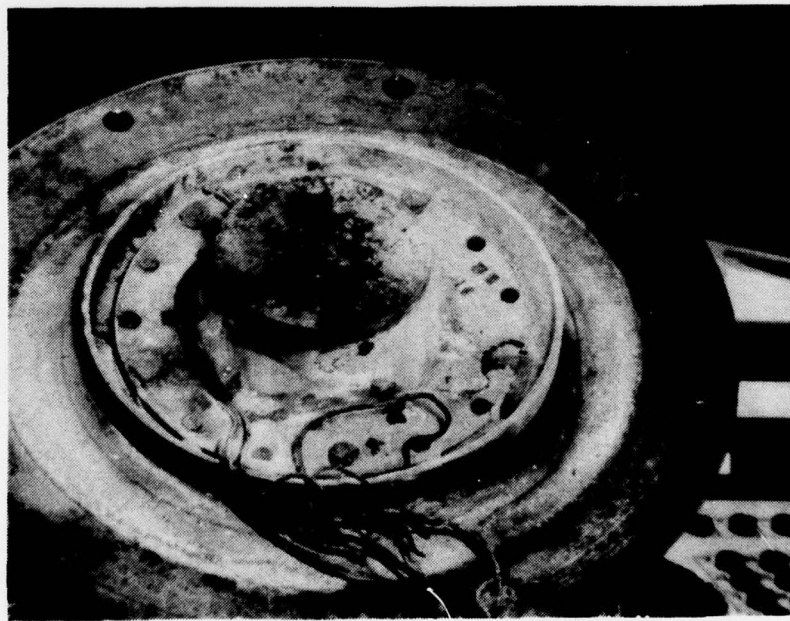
Upstream Side of Nozzle After Rig Corrosion Test
